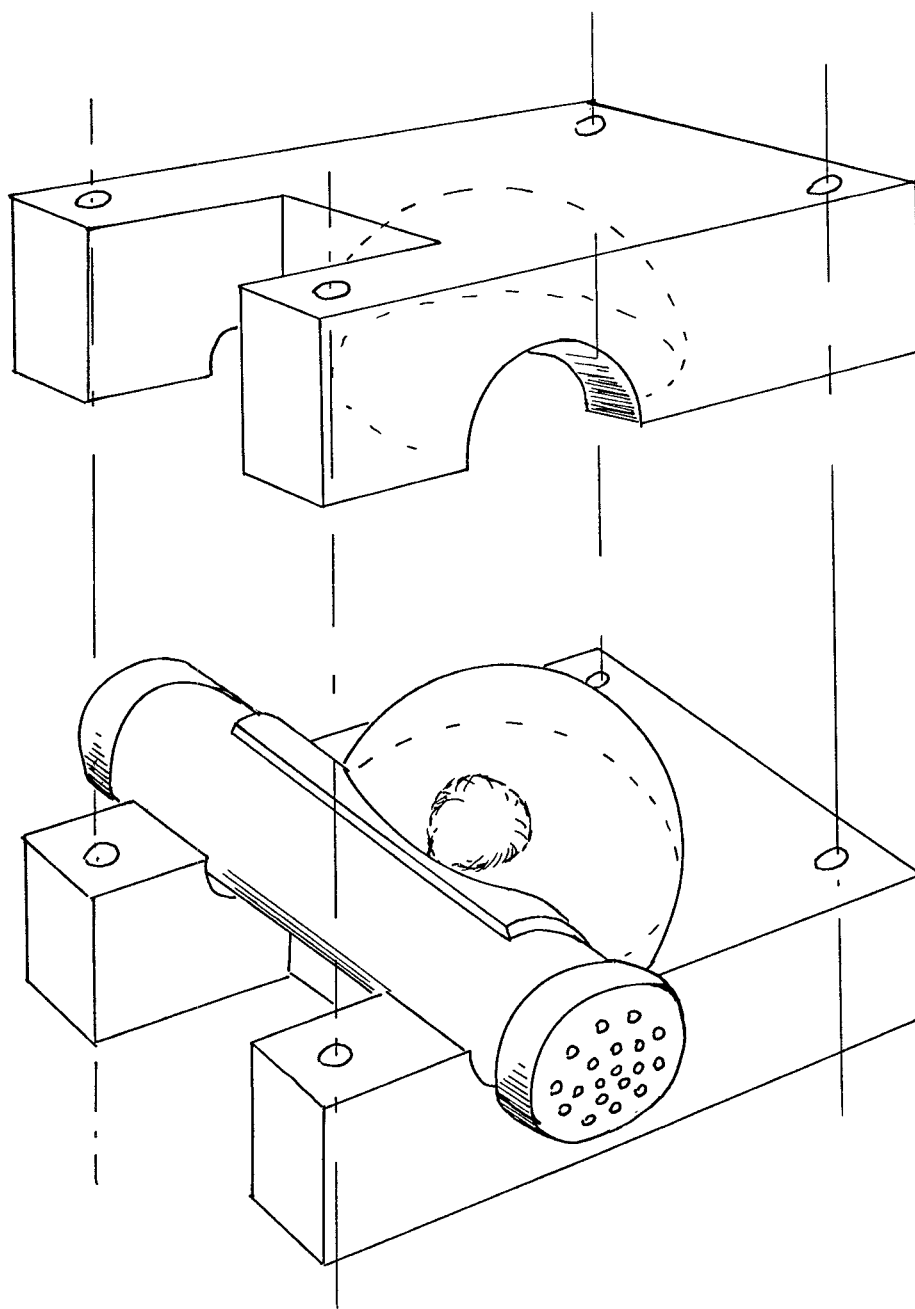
Two-piece mold assembly. Assembly bolts not shown.
